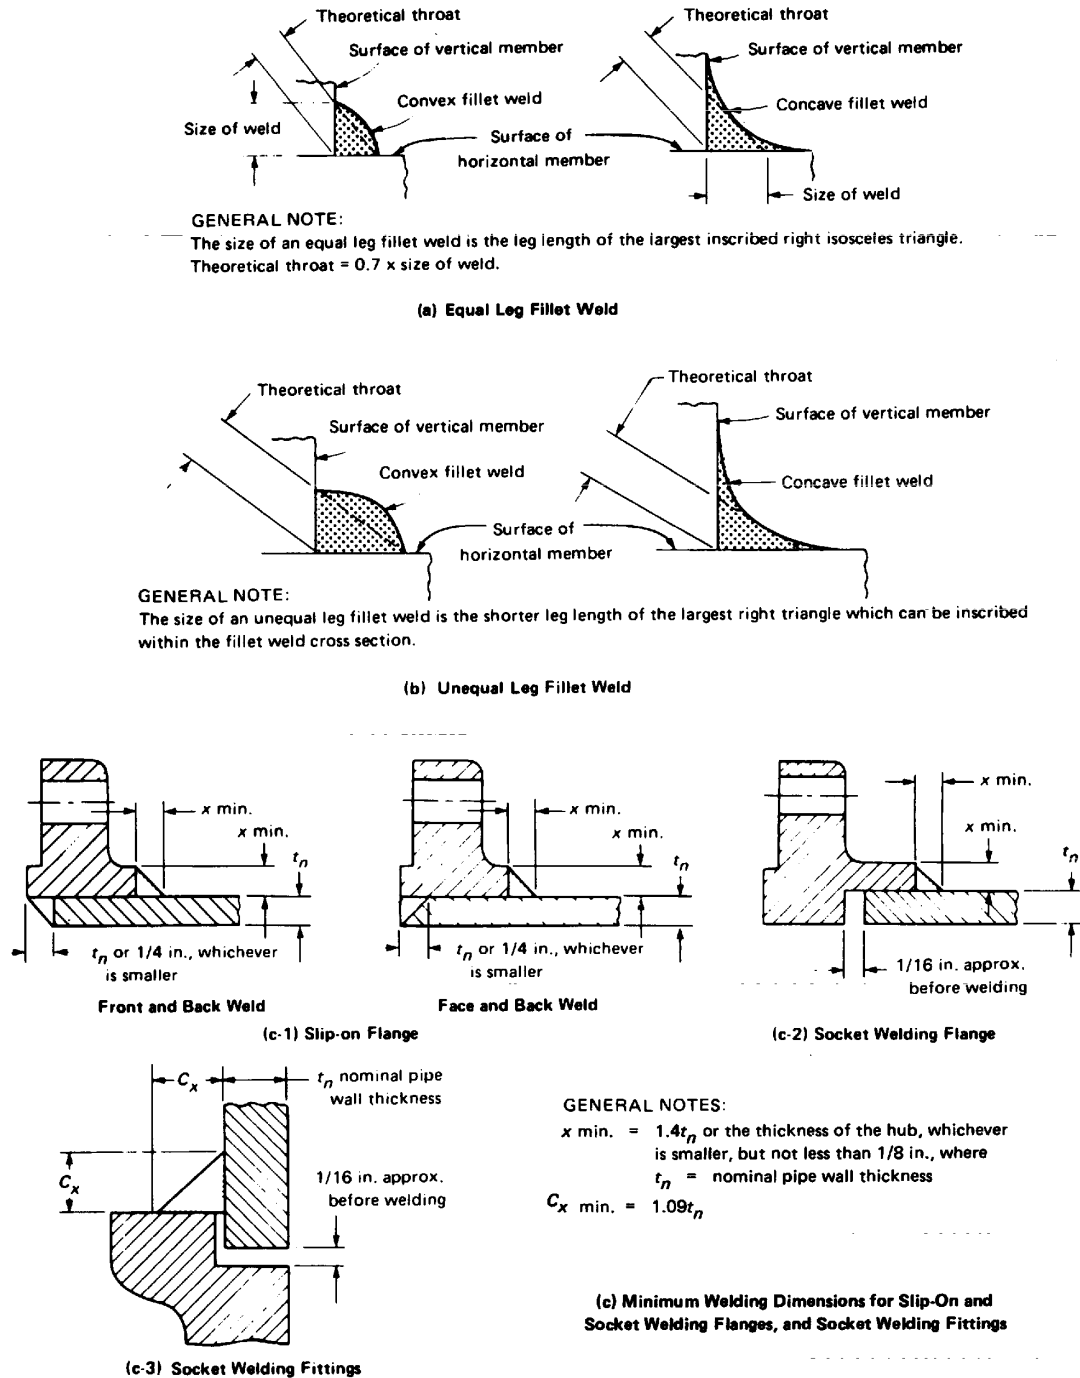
FILLET AND SOCKET WELD DETAILS AND DIMENSIONS
